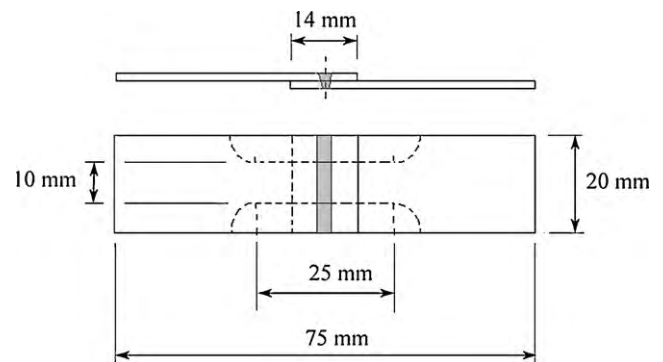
Lap joint configuration of AISI 316L thin foil and schematic diagram of tensile test specimen design (mm).
